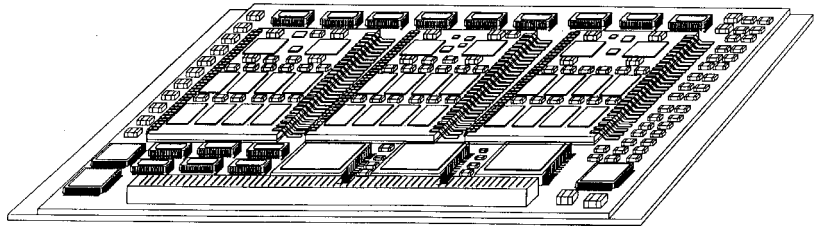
High-density surface-mount assembly with multichip carrier modules.
